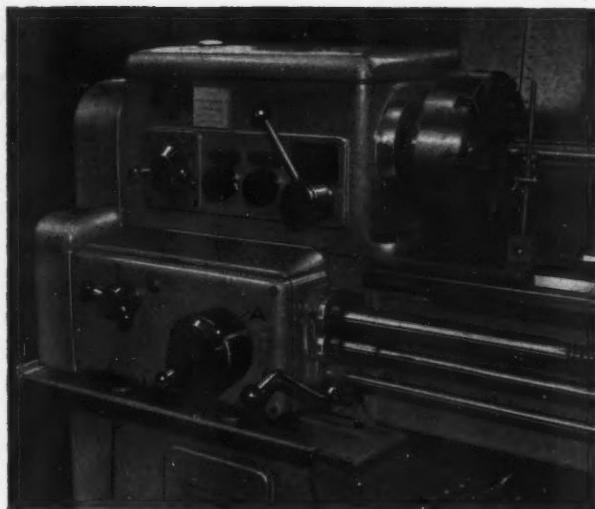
Close-up view of the headstock and feed gearbox of the IK62 lathe. Spindle speeds are selected by means of two levers, and there is a single drum for engaging different sliding and surfacing feeds within the ranges provided
